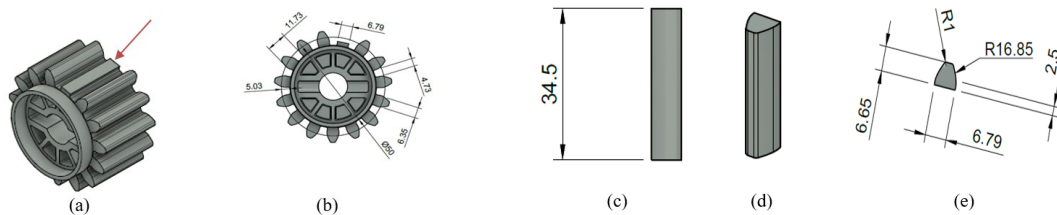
(a) Refined reconstructed digital model, (b) Gear dimensions, (c) Broken tooth's front view, (d) Isometric view and (e) Sectional views. (All unit is in mm)
